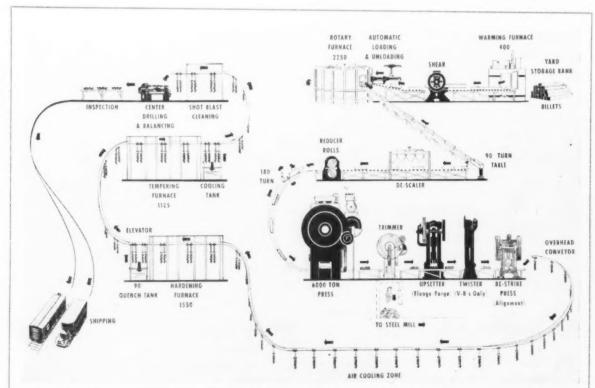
From billet storage through rolling, press forming, trimming, re-strike and heat treat operations, Dodge Div., Chrysler Corp. press shop processes its crankshafts in a continuous line. Simplified plant layout shown here.
